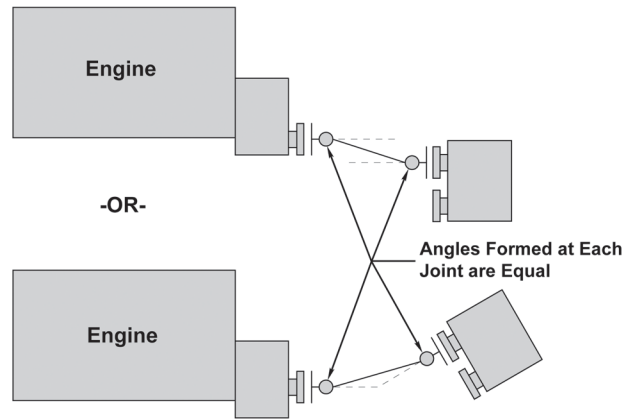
Remote Mount Gear Using a Shaft with Universal Joints
